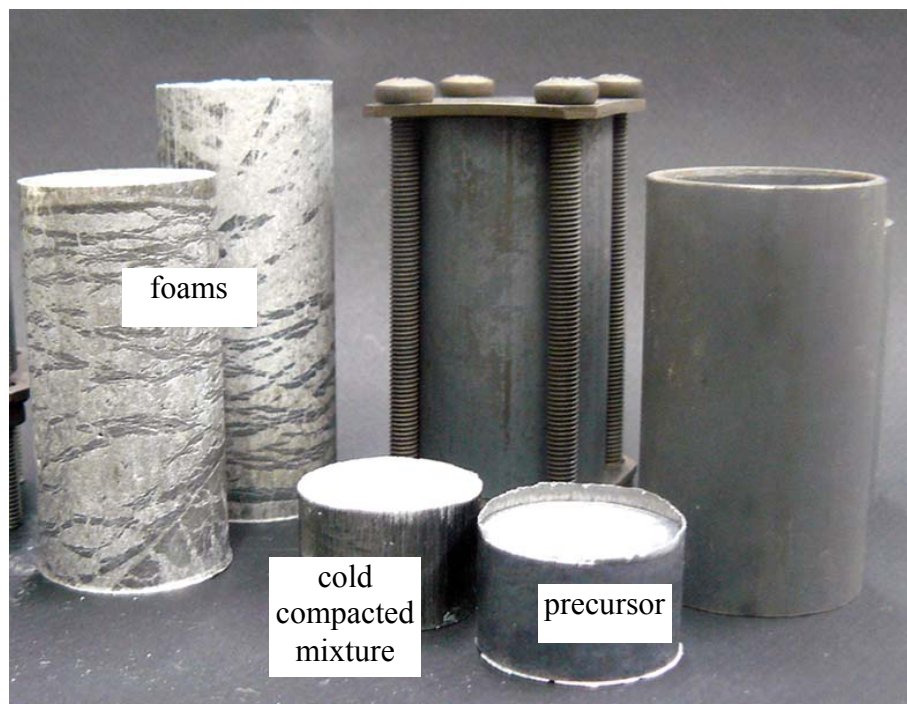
Precursor, foam, stainless steel tube and foaming mold assembly
